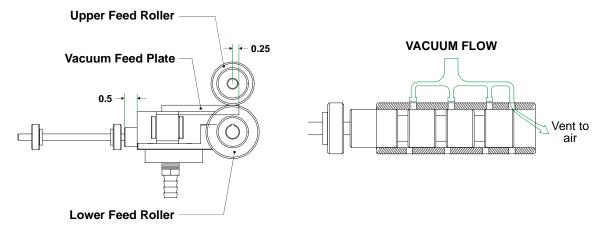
Feeder vacuum valve assembly illustrating the location of the spool assembly when the shuttle feed plate is 1/4" past the center of the feed rollers. Side view shows vacuum flow from the top to the exhaust port when vacuum is released. End port shown is the vent port which is fully open.
